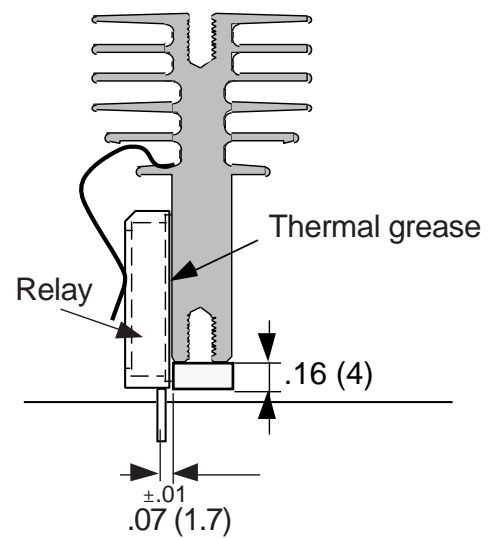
Mounting with L 19101 clip; dimensions in inches (mm)
